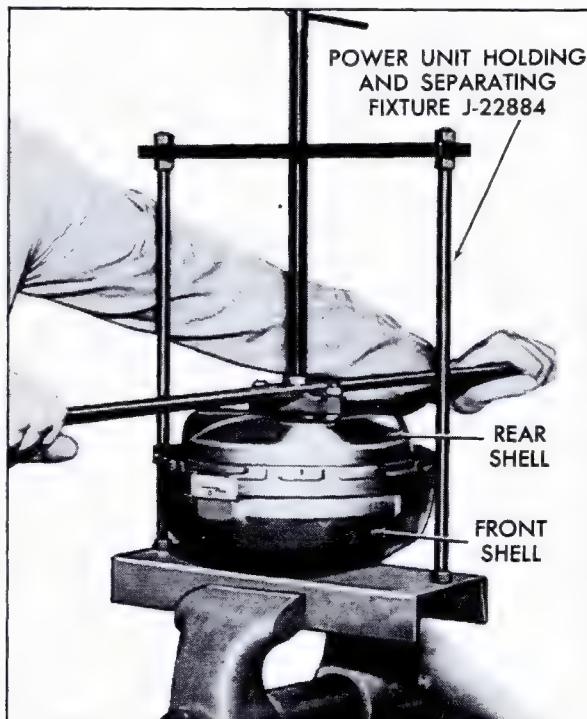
Removing Rear Shell - Tandem Diaphragm
